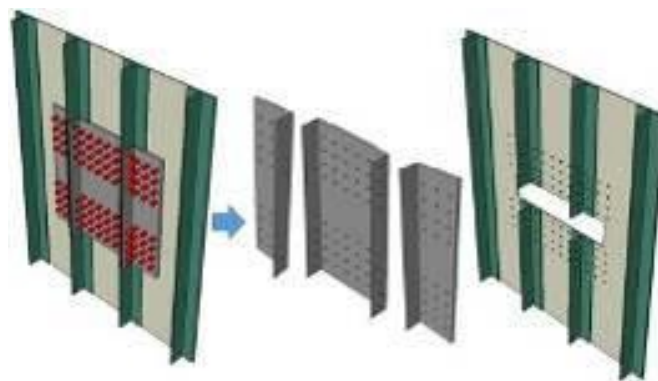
Details of repair parts for vertical tail stiffened panels with discrete source damage
